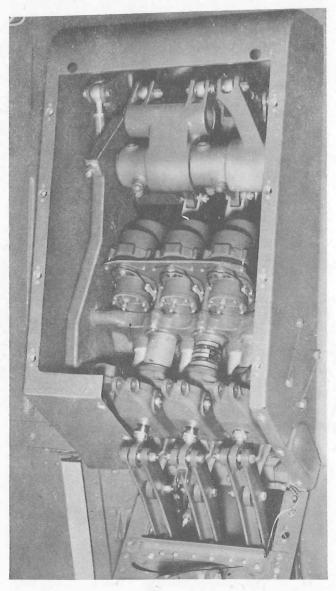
Main Rotor Auxiliary Servo and Mixer Assembly Installed
